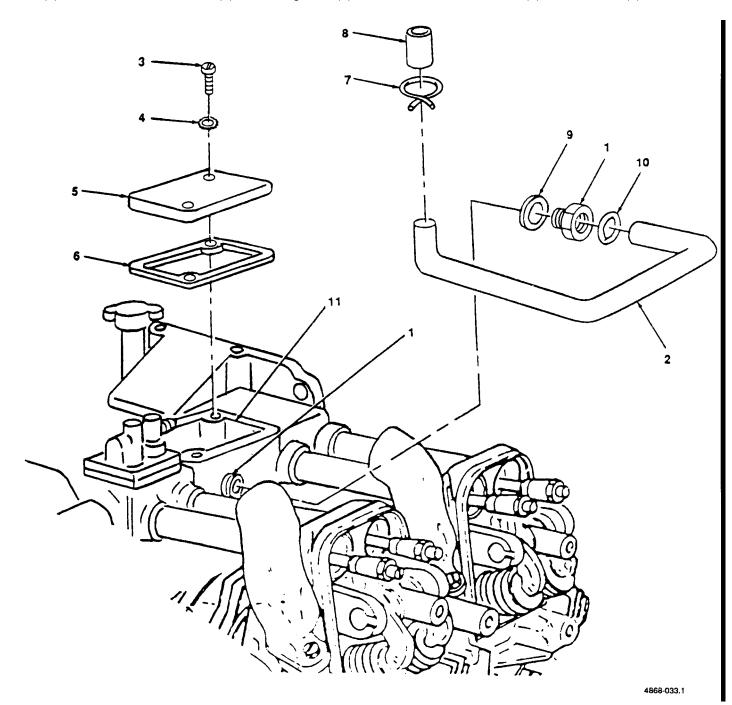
Breather Box Cover and Breather Tube, Removal, Inspection and Installation.
